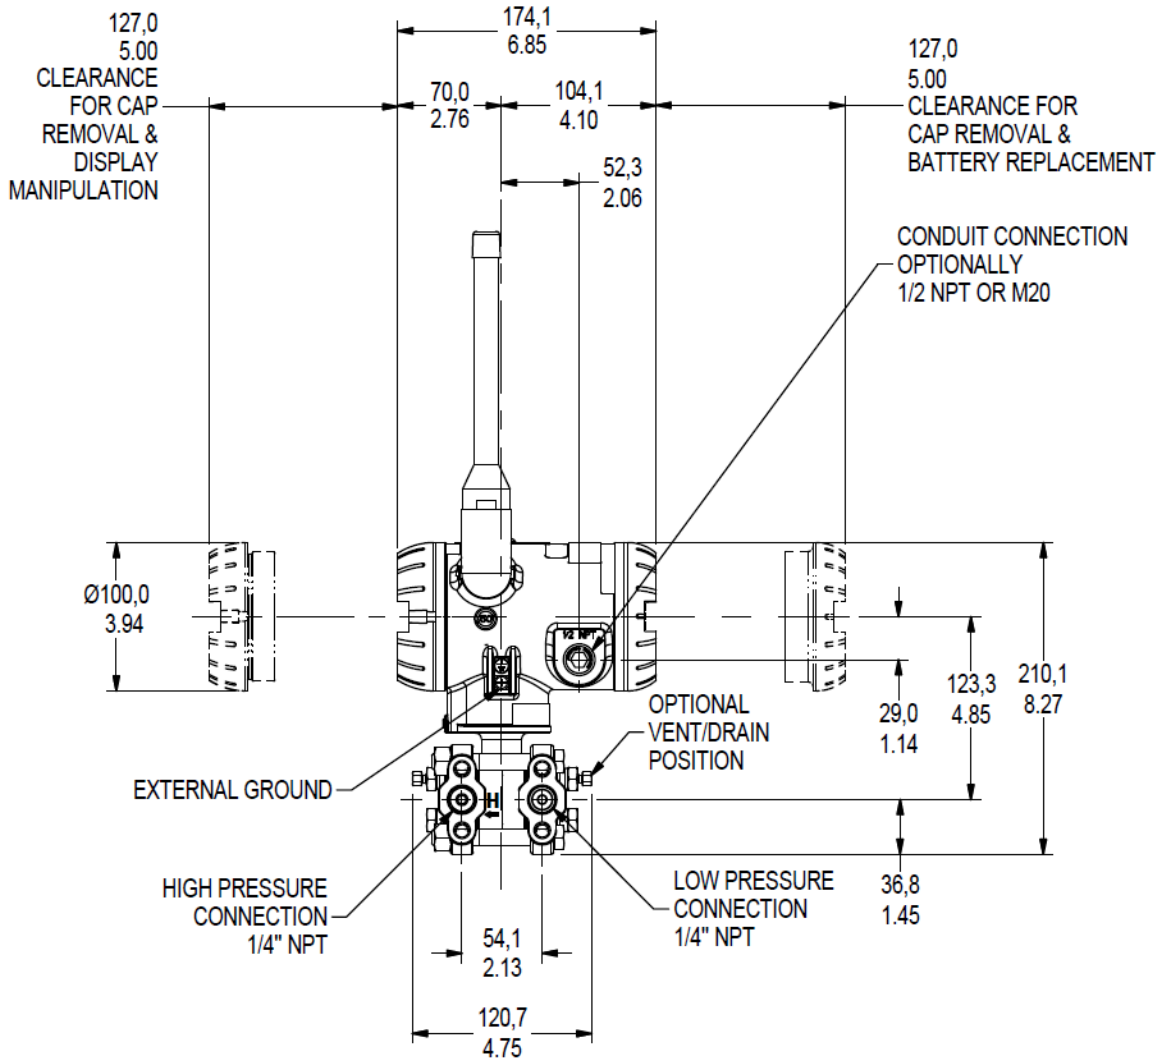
DP/DHGP Pressure transmitter dimensions unit mm/inch
